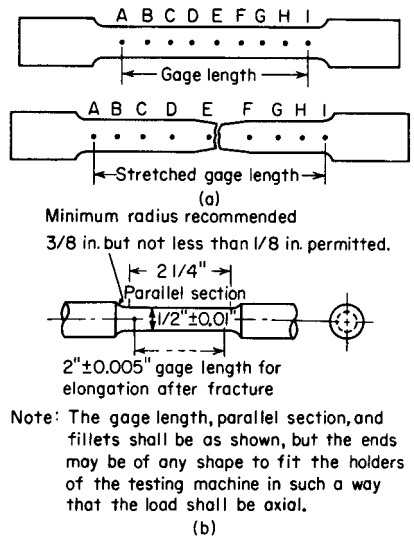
Tension-test specimens. (a) Strip specimen showing measurements which are taken to determine elongation; (b) standard round specimen with 2-in gauge length.
